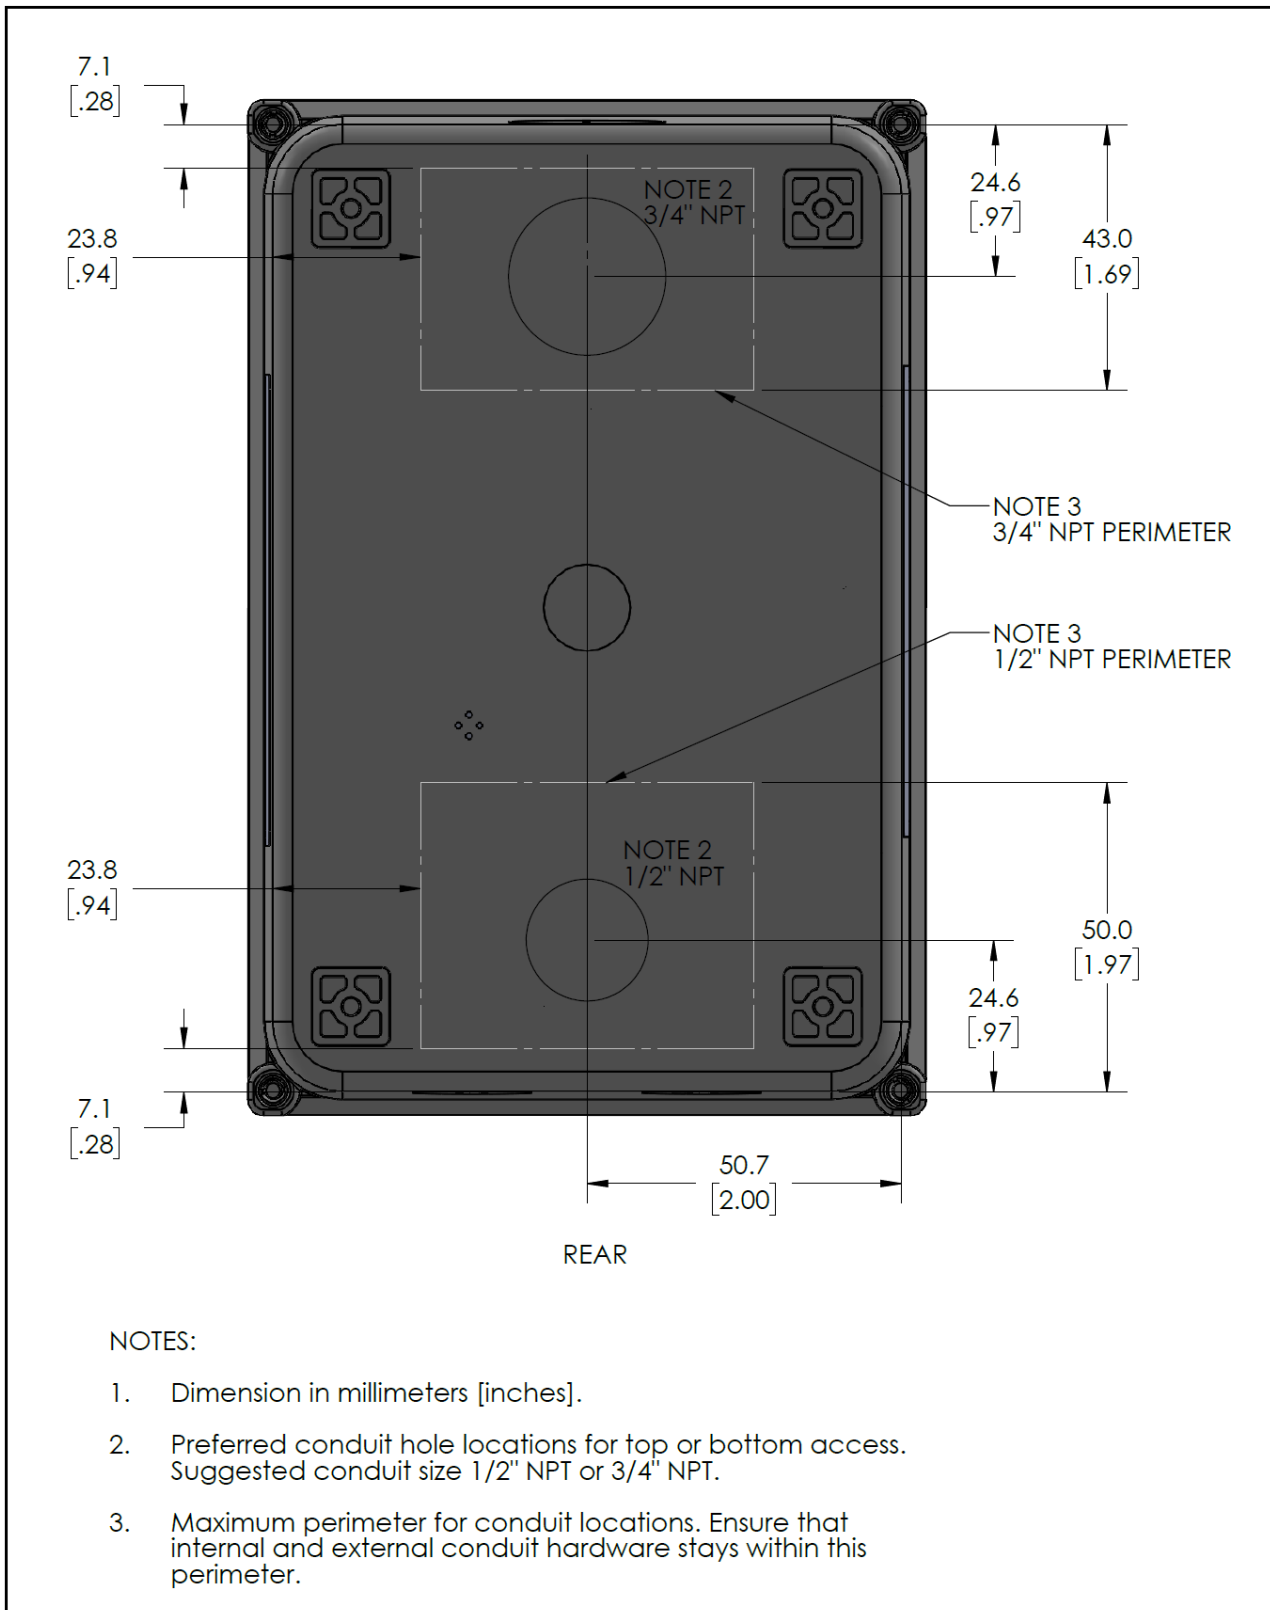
SB4000 Conduit Cutout Locations - Rear.
